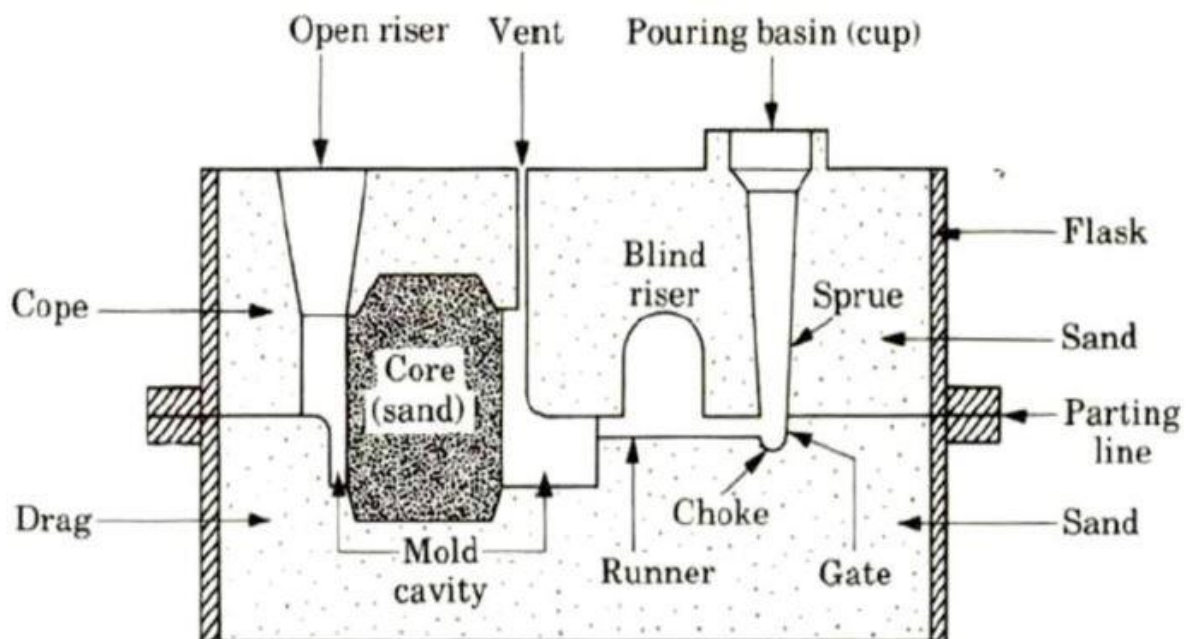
Diagram illustrates a sand casting mold, showing the flow of molten metal from the pouring basin through the sprue, runner, and gate into the mold cavity. Picture: Osama Mohammed [5]
